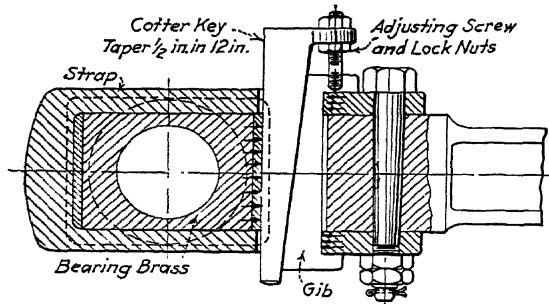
Connecting rod end, showing cotter key and adjusting gib.
